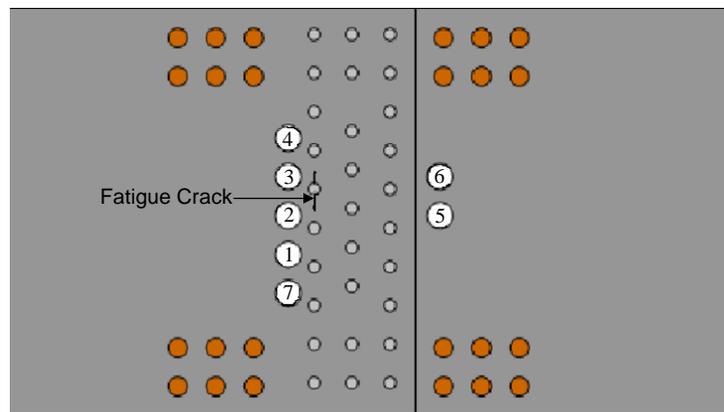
Location of PZTs relative to cracked rivet hole on lap-joint.
